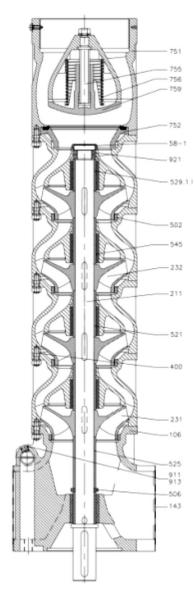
General assembly drawing: BRVS 486 submersible borehole pump
